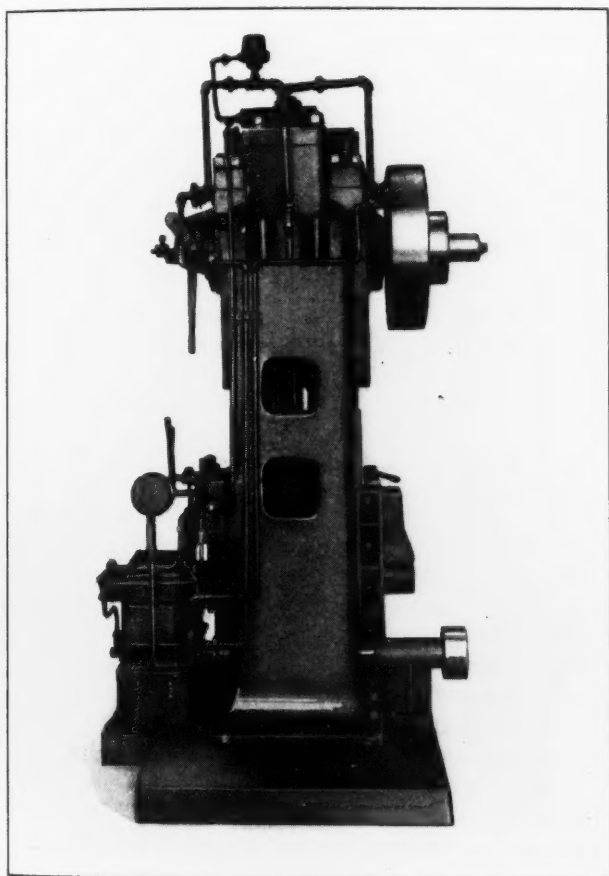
View Showing Arrangement of the Oilgear Hydraulic Equipment
